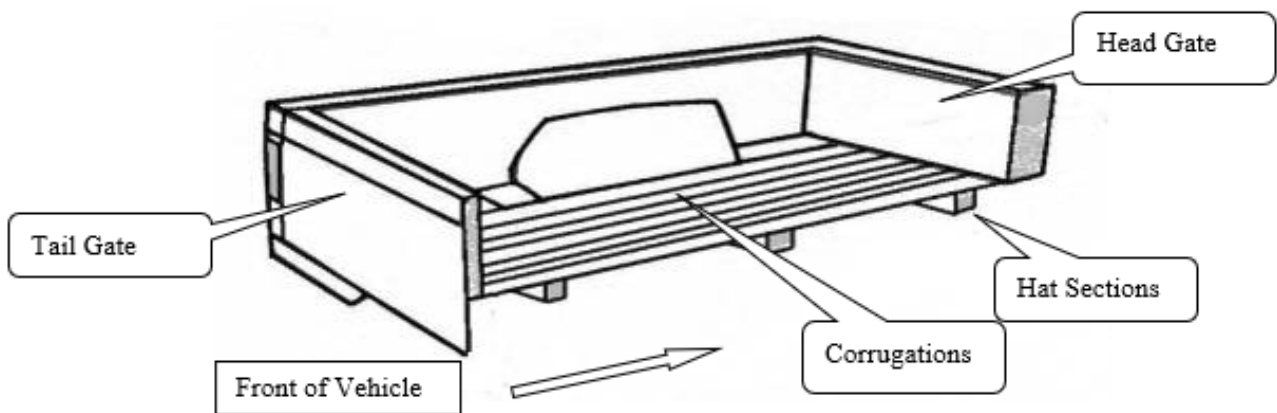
This cutaway drawing shows the head gate and bed corrugations.
